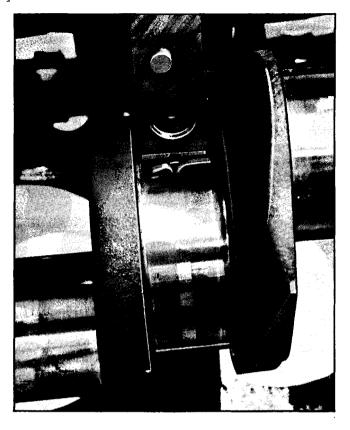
Tool Installed for Removing Upper Half of Main Bearing
